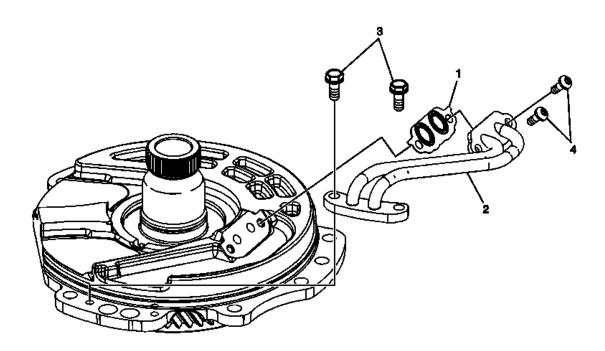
Identifying Front Differential Transfer Drive Gear Support Seal Courtesy of GENERAL MOTORS COMPANY
